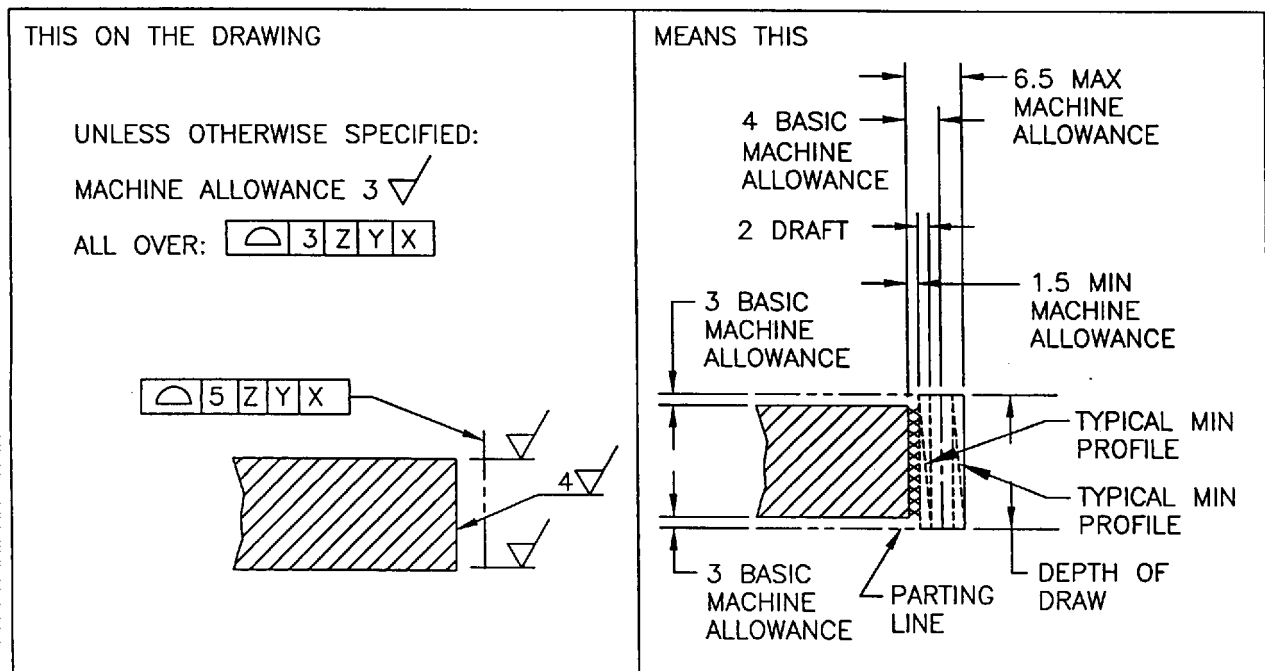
MACHINE ALLOWANCE — SURFACE WITH DRAFT
